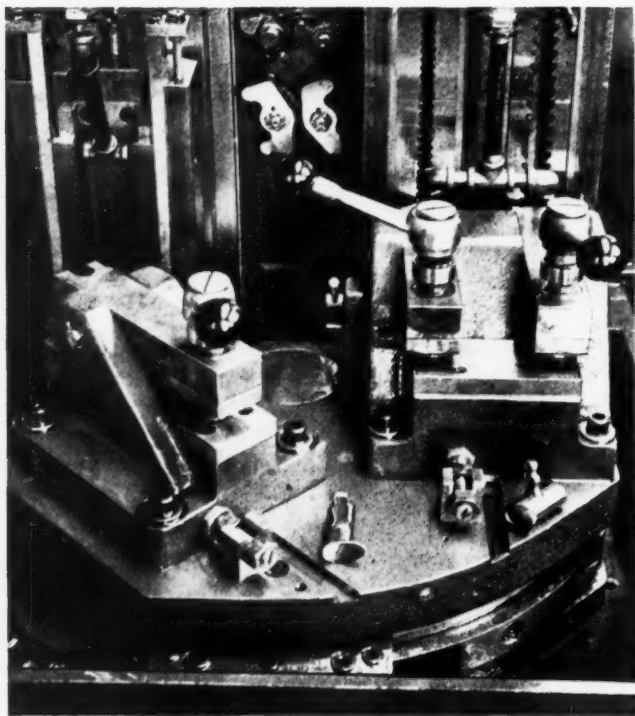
Broaching Machine Equipped with Variable-speed Control and Special Fixtures for Holding Transmission Shifter Levers
